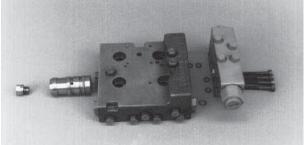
Install PCOR Defeat Spool Stop Plug
